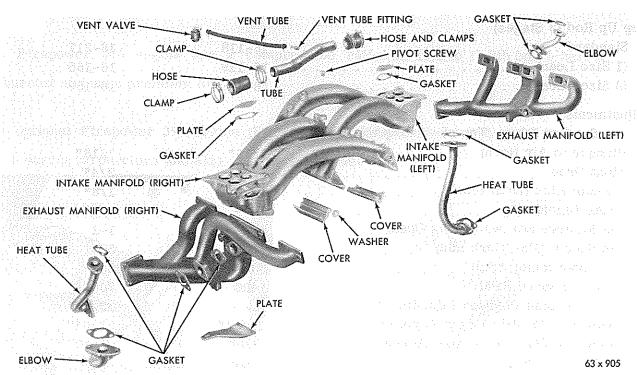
FirePower 390 Engine Intake and Exhaust Manifolds (Disassembled)
